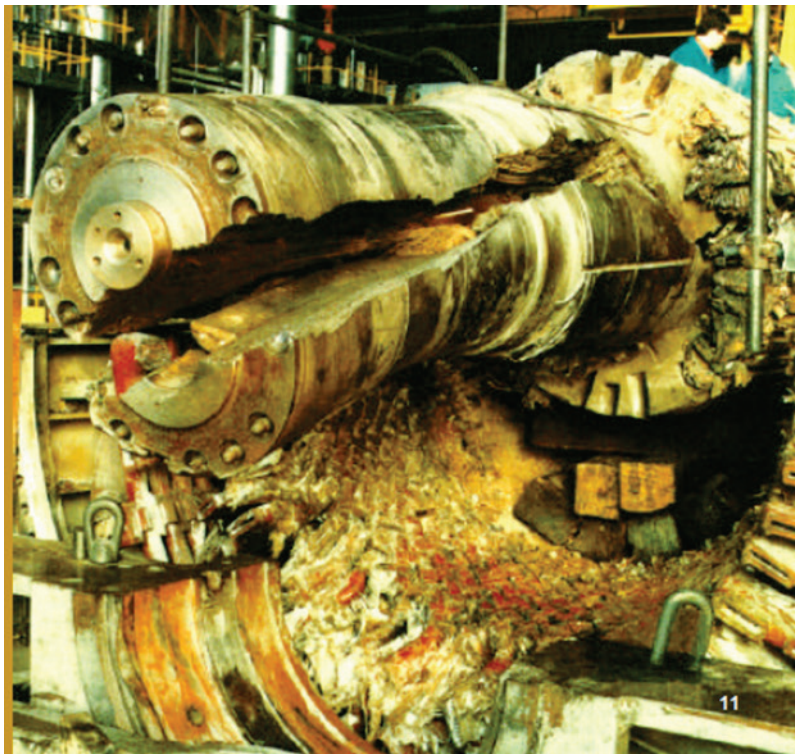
Completely destroyed generator caused by fatigue crack (Porcewille)
